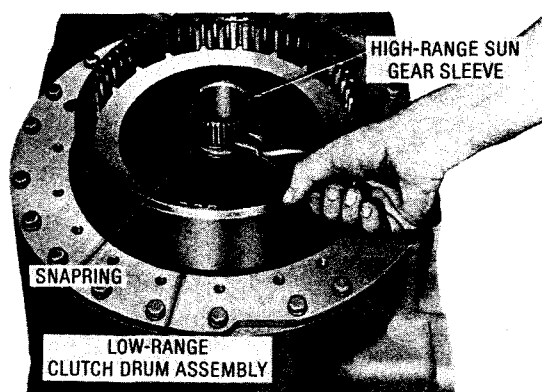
Removing high-range sun gear sleeve snapring (TRT 2221-1, 2421-1)
